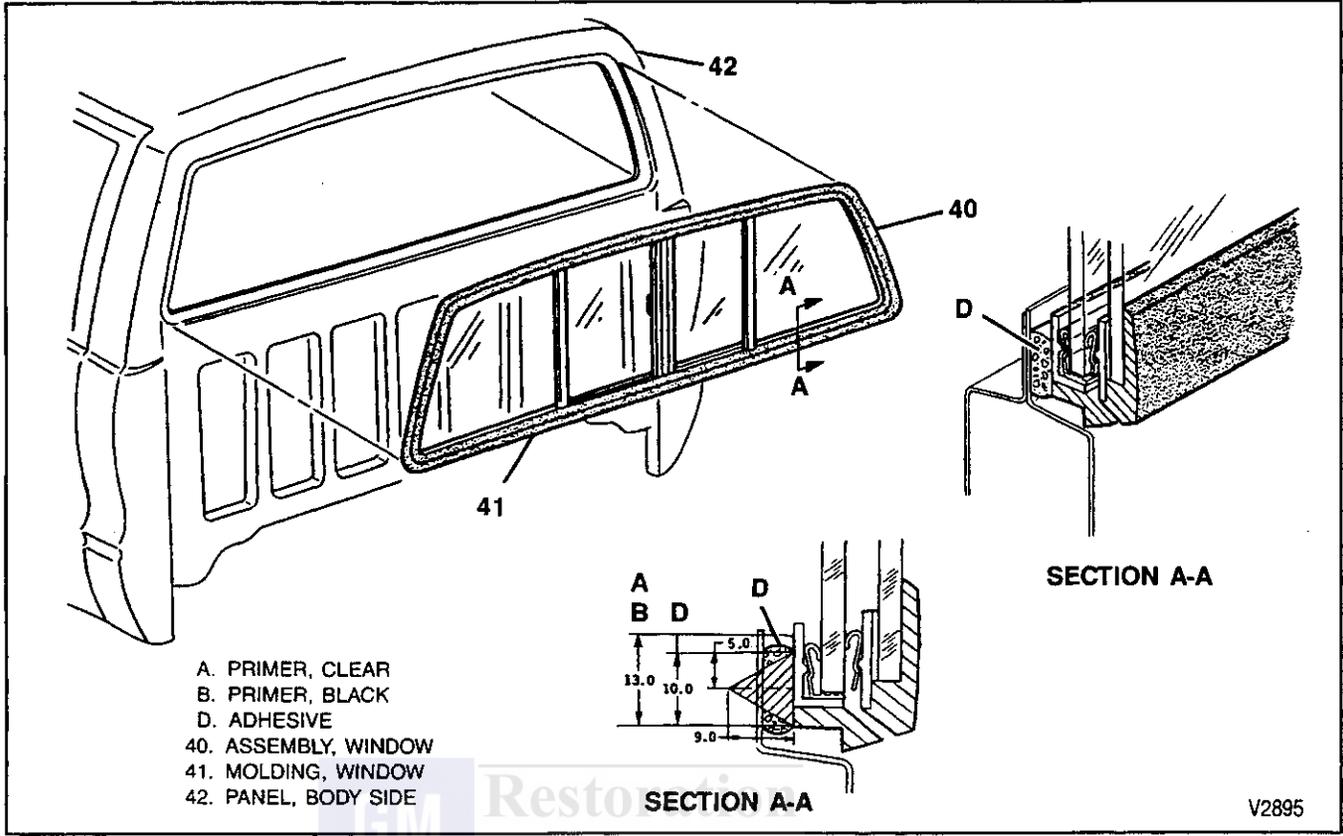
Rear Sliding Glass Window Assembly-Pickup
